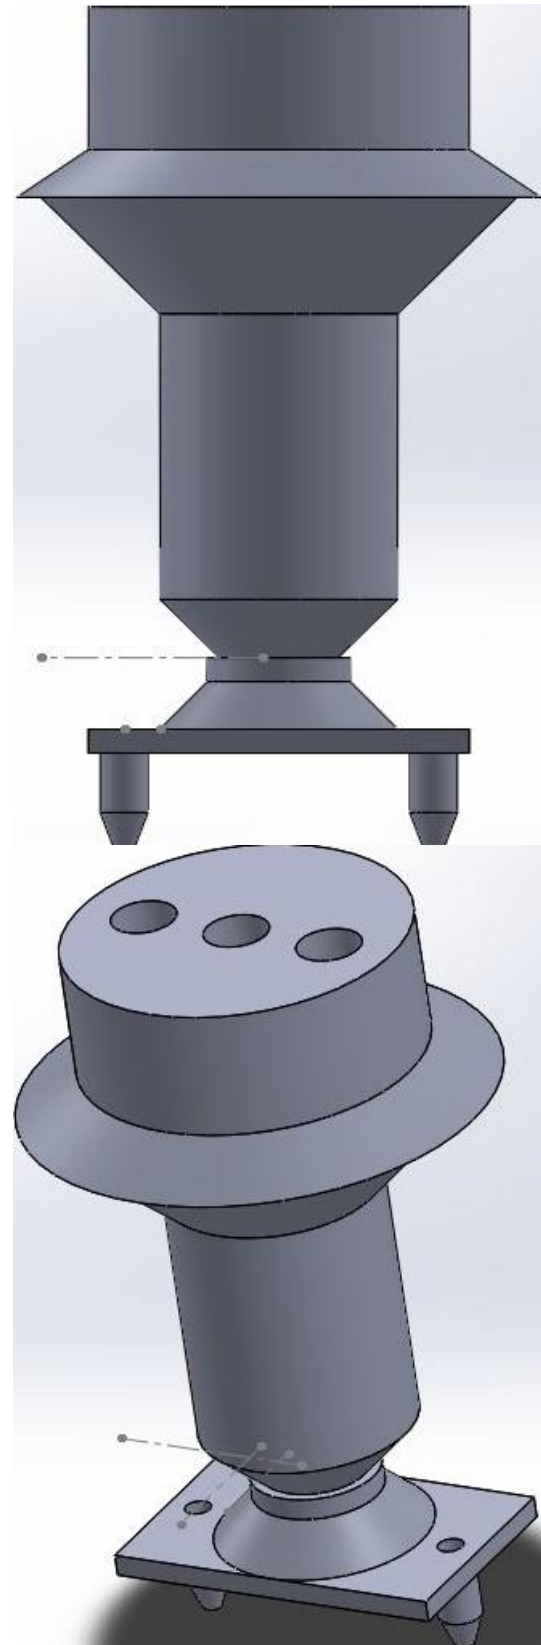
Assembly of the nozzle and the rubber key 2D.
